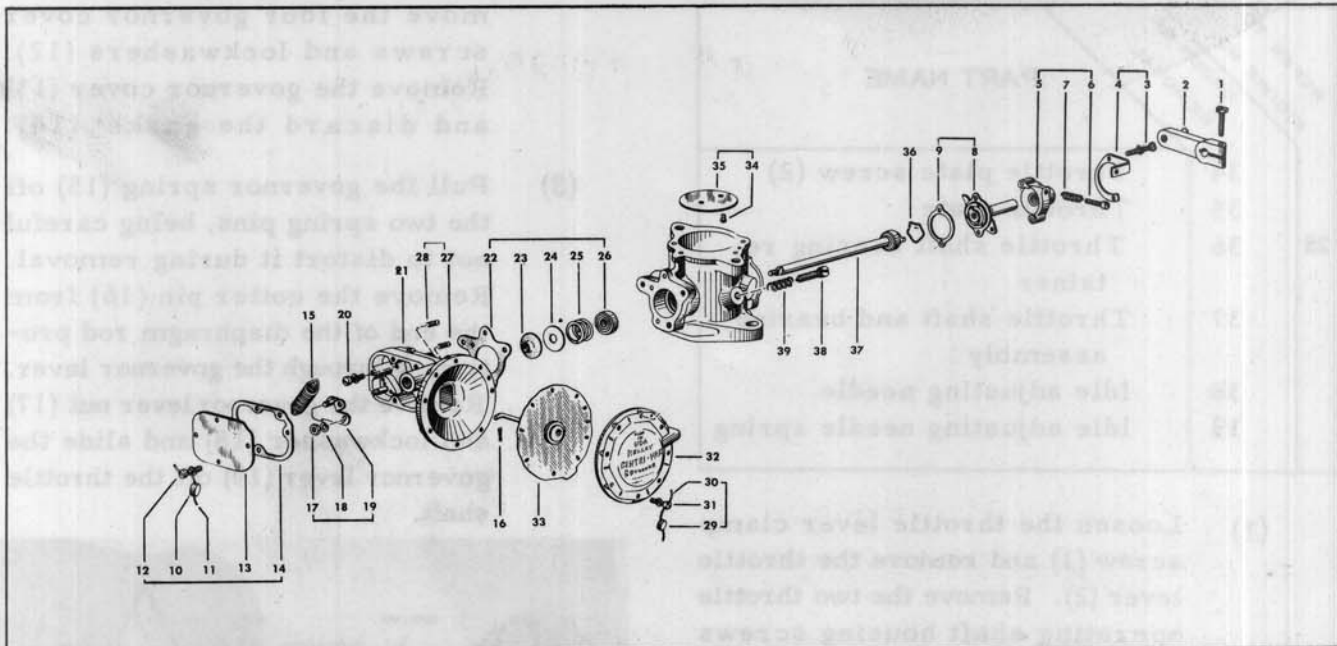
DISASSEMBLY GOVERNOR & THROTTLE BODY T-847HGC
